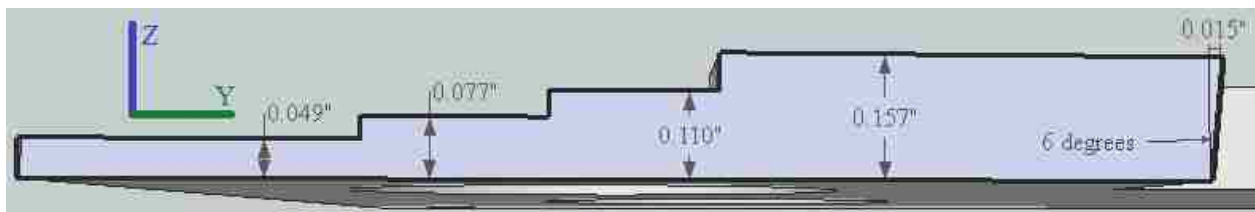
Cross sectional view of the 10x10 cm² upper trimmer lead plate in the in-plane dimension illustrating the thickness values of the plate.
